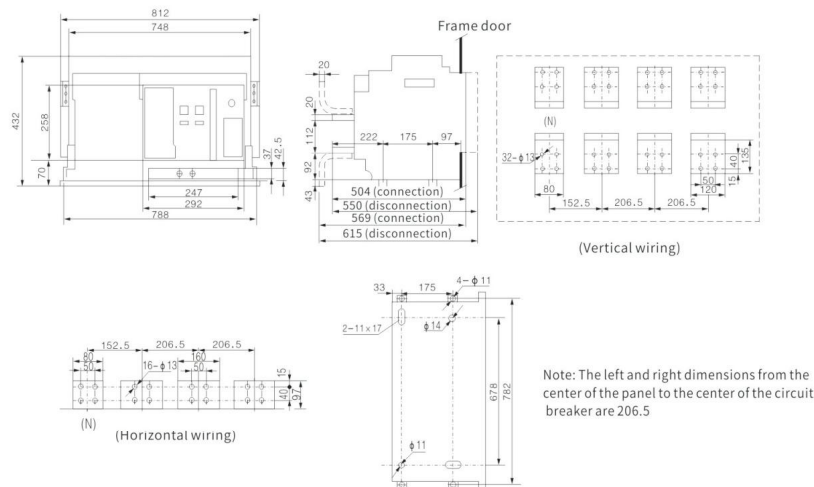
Outline and installation dimension of the draw-out type circuit breaker (W1-4000/4)
